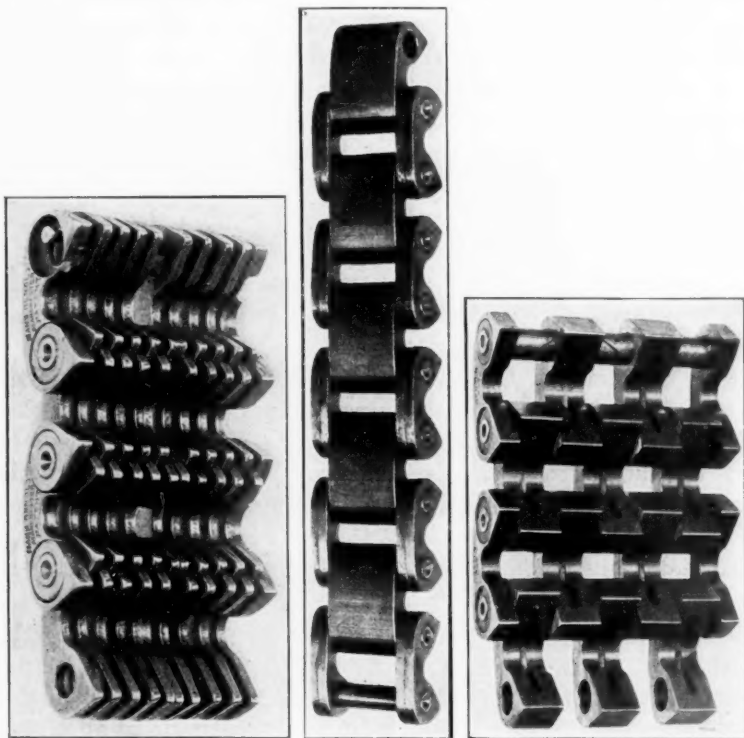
STAMPED CHAIN. FIG. 150.—BLOCK CHAIN. FIG. 151.—MULTIPLE BLOCK CHAIN.
